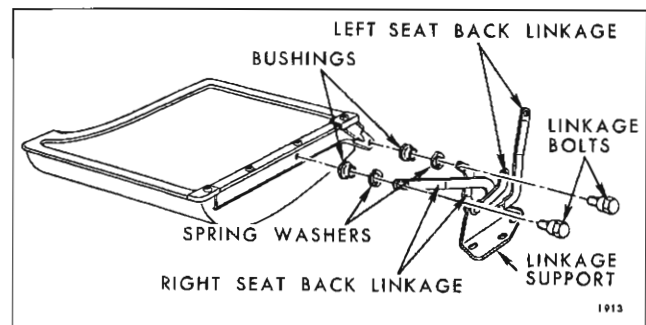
H39—Folding Second Seat Back Inner Linkage and Support
